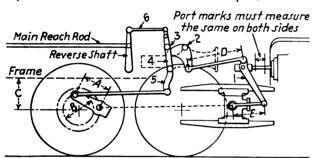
Assembly of Baker valve gear (1—Combination lever. 2—Bell crank. 3—Reverse yoke. 4—Radius bar. 5—Gear connecting rod. 6—Gear reach rod. Letters refer to Table II.)
